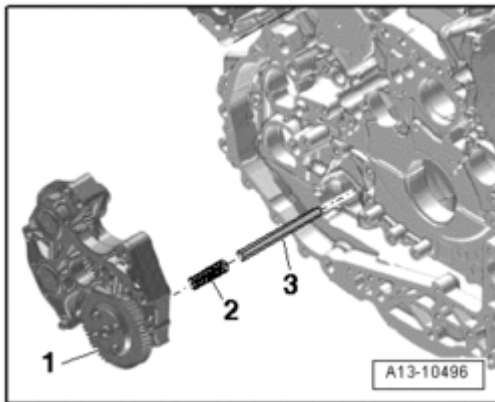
Positioning Compress Spring For Input Shaft In Spur Gear Unit
